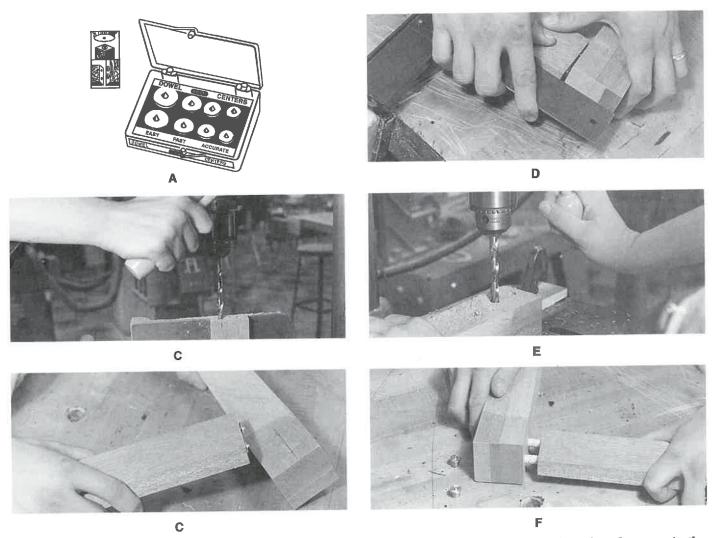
A—Dowel centers. B—Drilling holes in apron end for dowel joint to leg. C—Place dowel centers in the apron to mark hole locations. D—Keep the parts square while pressing the apron to the leg. E—Drill dowel holes in the leg at locations marked by the centers. F—Assembling the leg and apron.
